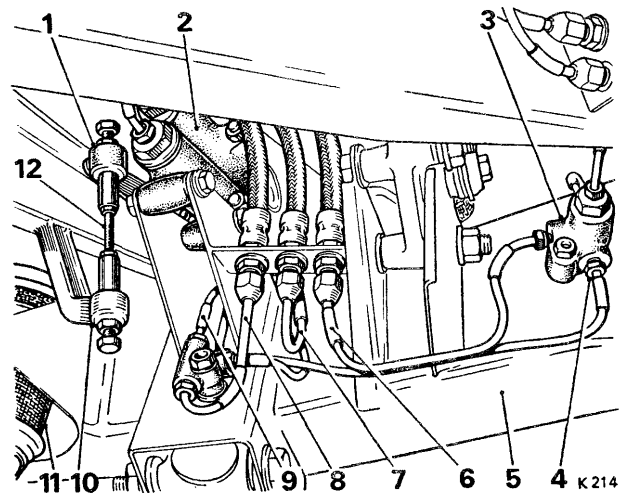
LEFT-HAND SIDE REAR HEIGHT CONTROL VALVE IN POSITION
